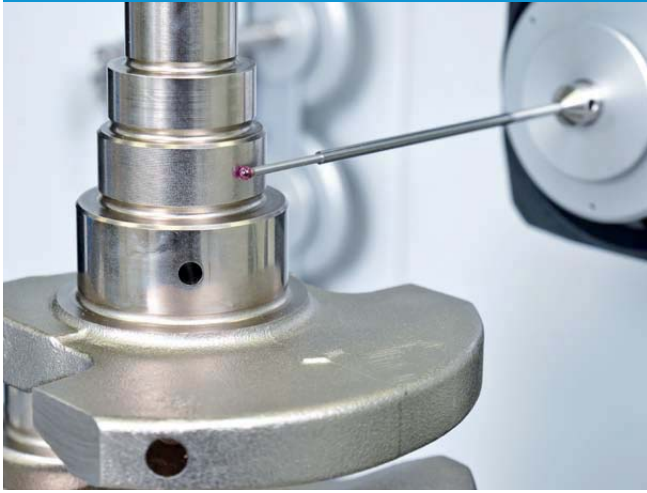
Measurement of bearing seats (dimension, form, and position)
